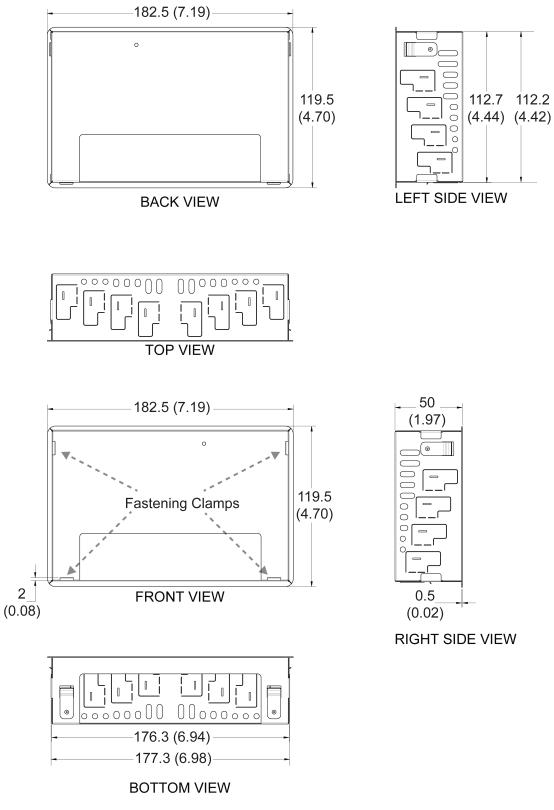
HORYZON-C7 Wall Mounting Kit dimensions
